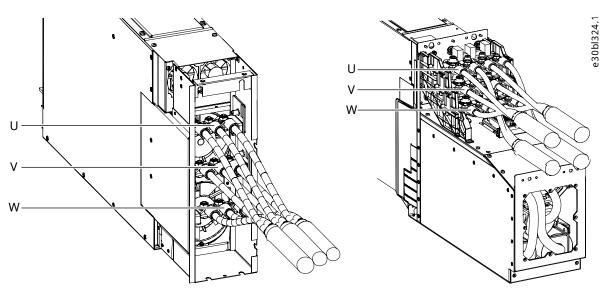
Motor Cable Installation, IM10, IM11 (left) and IR10, IR11 (right)
